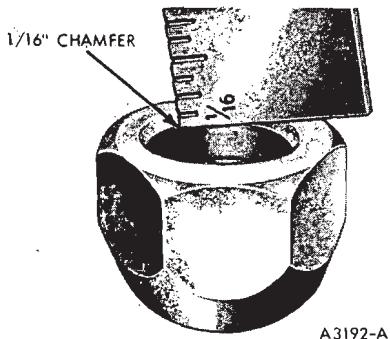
Measuring Chamfer on Valve Rocker Arm Stud Nut
